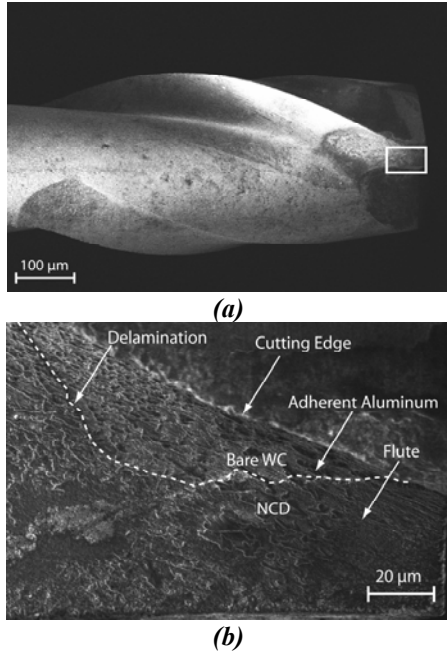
(a.) Side profile of NCD coated end mill after 2 m of milling, and (b) magnified image of cutting edge and flute showing NCD present within the flute of the end mill.
